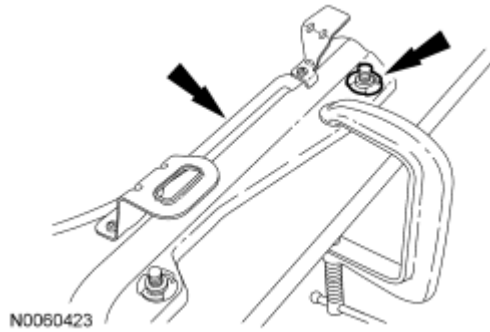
Clamping Side Plate To A Bench Or Table Using A Suitable Tool
